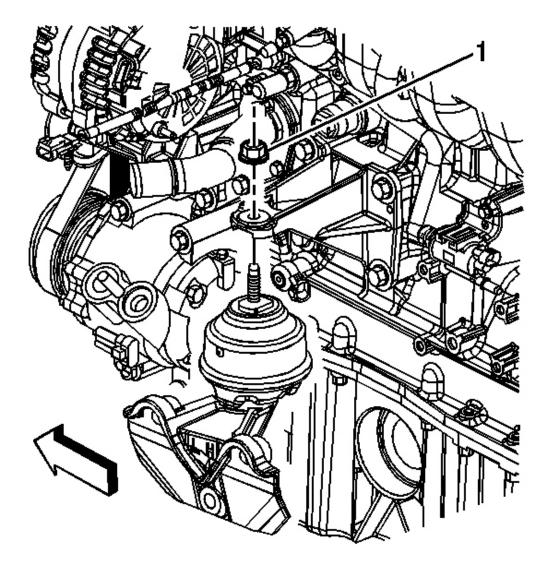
View Of Left Engine Mount Courtesy of GENERAL MOTORS CORP.
